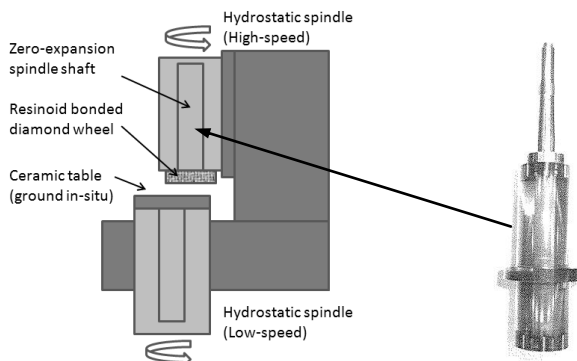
SSUPG machine (left) and photo of glass-ceramic spindle shaft (right) [8].
